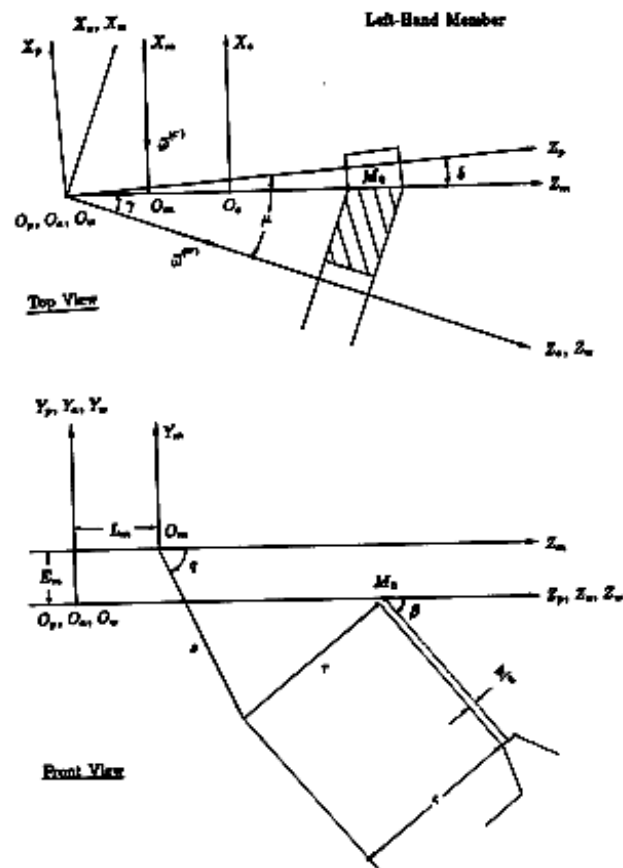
Top And Front Views Of Left-Hand Gear Generator
